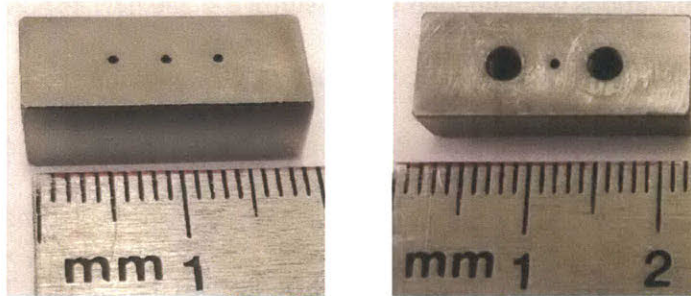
Steel plates with three needle sized holes from original design by Gonçalves da Silva (2016). Only two holes are used for this modified design. Left: specimen-facing side (front) of plate where it presses against the O-ring and steel housing. Right: outside-facing side (back) of plate where it is supported by the rear steel bar clamp.
